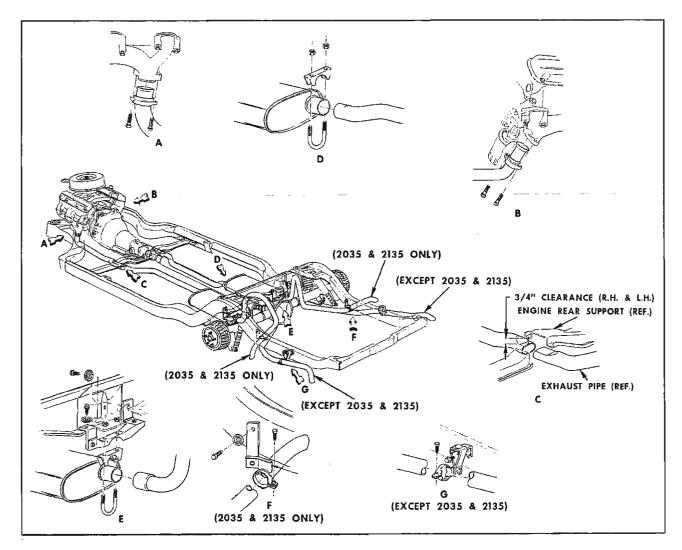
Exhaust System - Eight Cylinder Engine, Dual Exhaust
